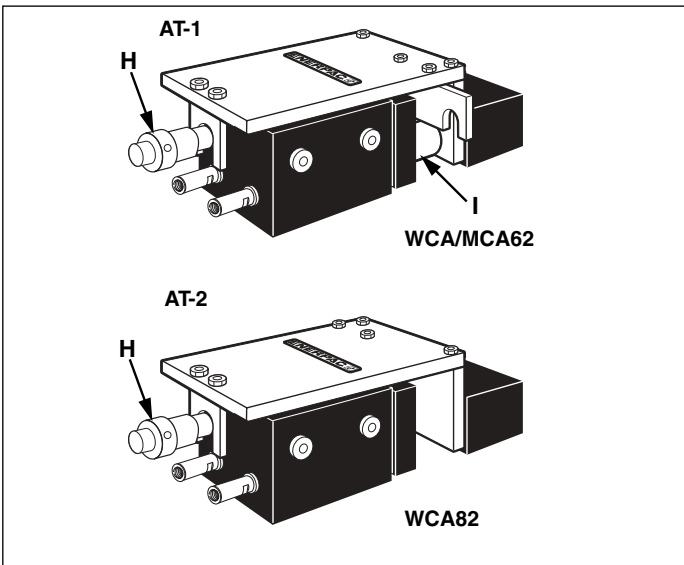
, Set-up and Mounting of Auto Coupler Using Alignment Tool
